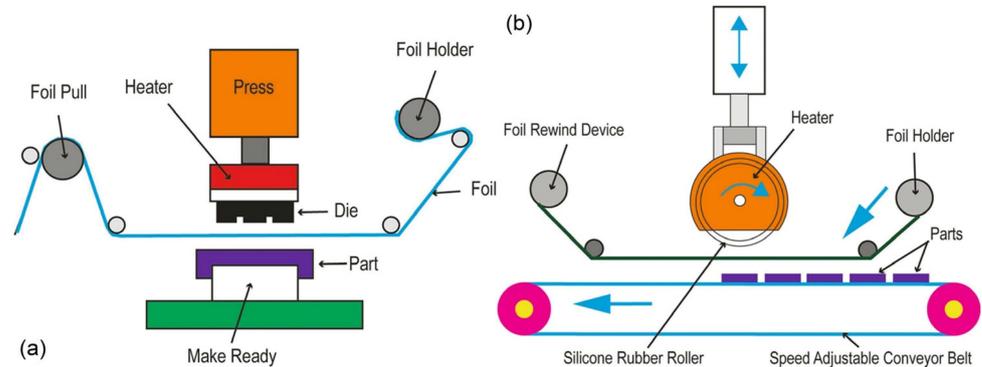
Principles of and tools for hot foil printing: (a) vertical hot foil printing machine; (b) roll-on hot foil printing machine [10].
